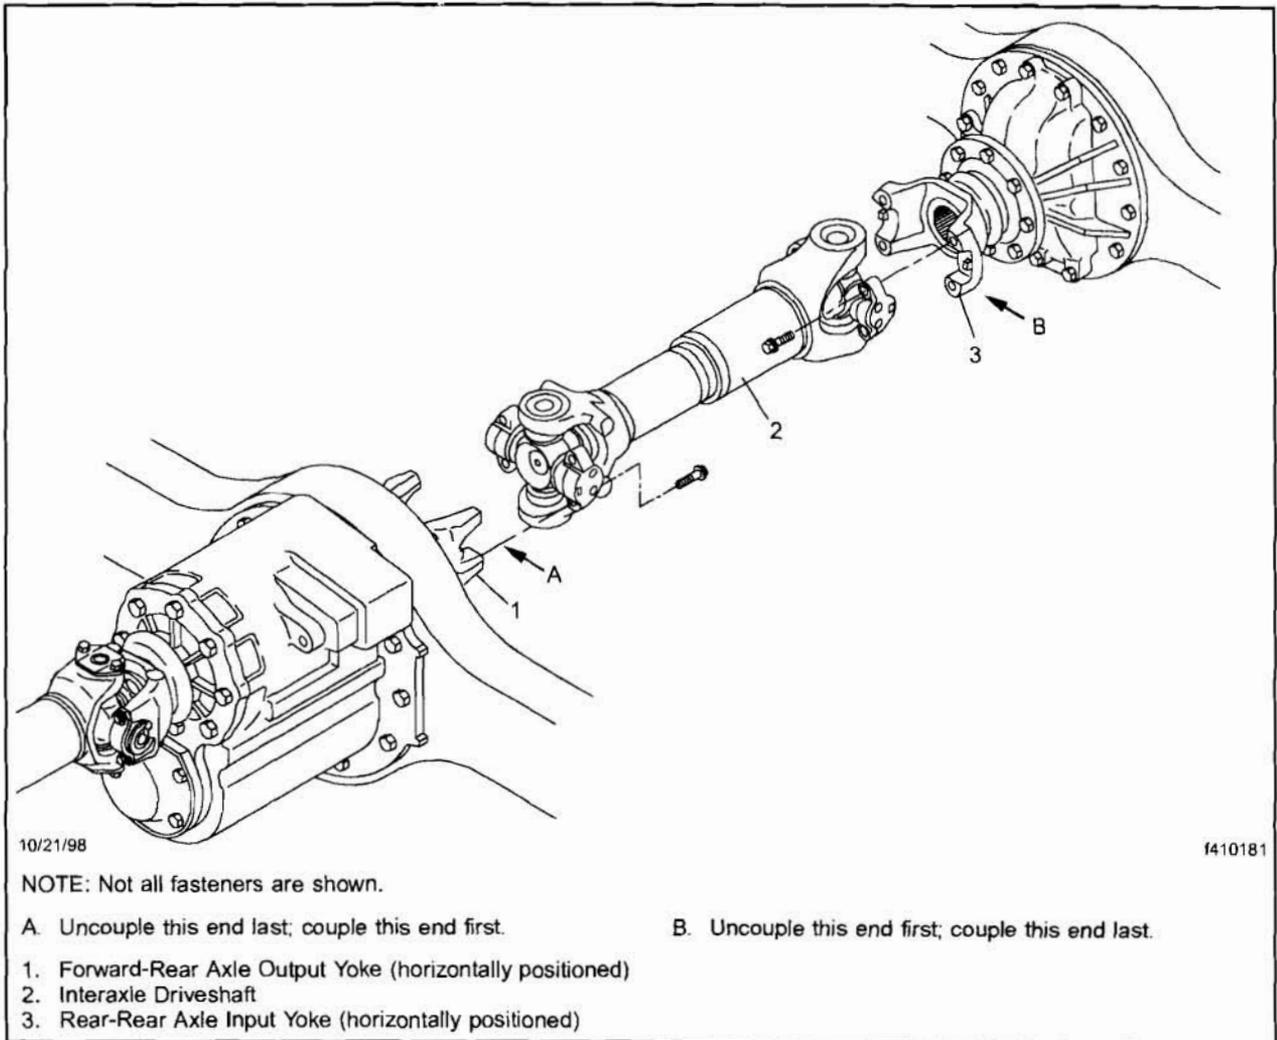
, Removal/Installation of the Interaxle Driveshaft
